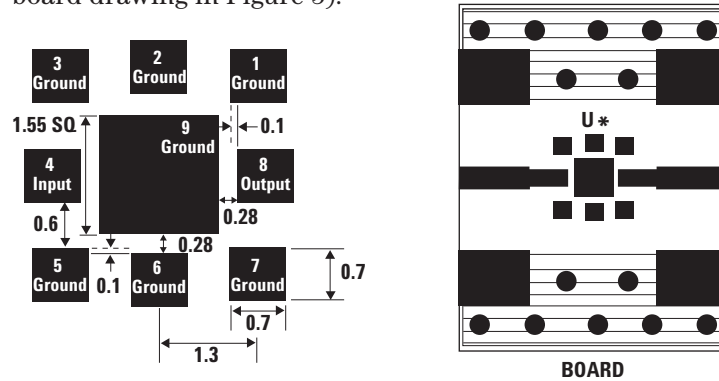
PCB footprint dimensions in mm; pad nomenclature and grounding description.
